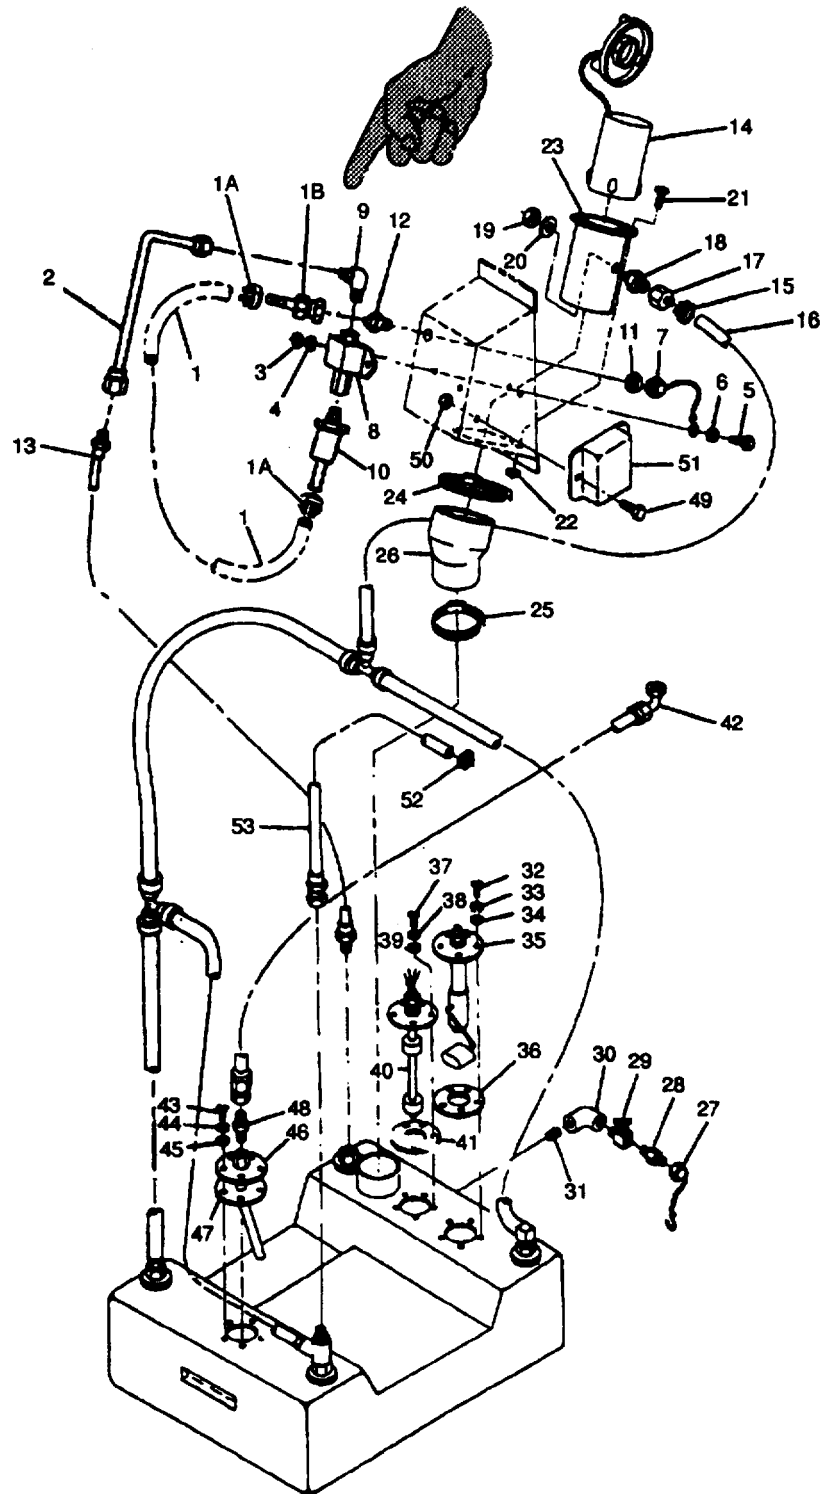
Fuel Tank Filler Neck and Low Pressure Fuel System
